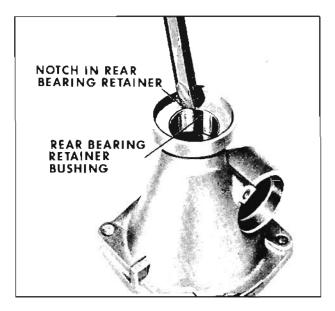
A Removing Rear Bearing Retainer Bushing
